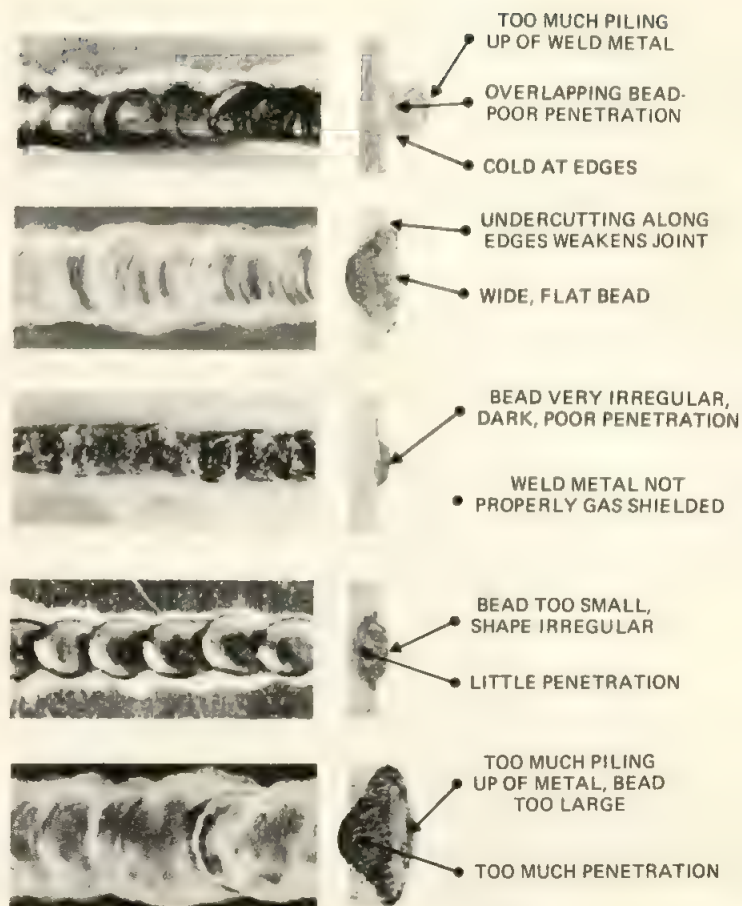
Quality factors of GTAW welding of aluminum.
